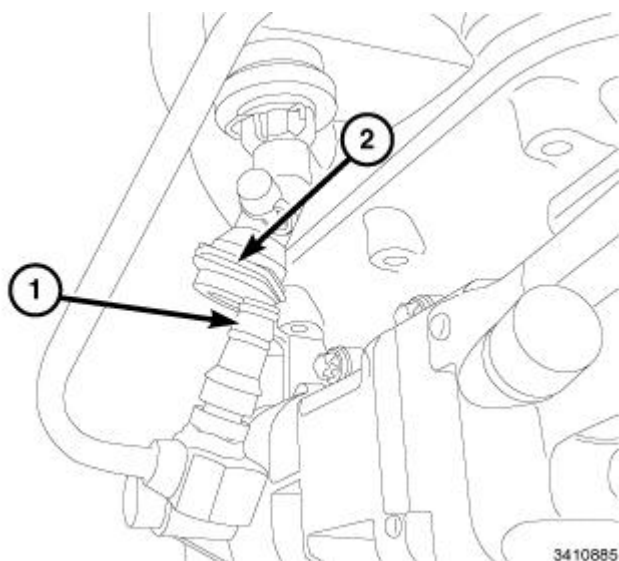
Hydraulic Supply Pipe & Concentric Slave Cylinder
